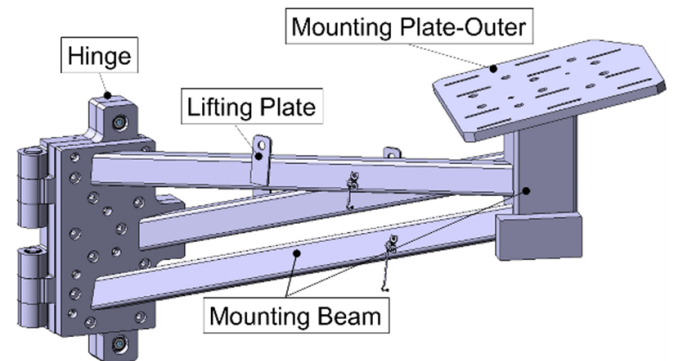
Model depicting the main sub-assemblies of the 'mounting arm' assembly.
